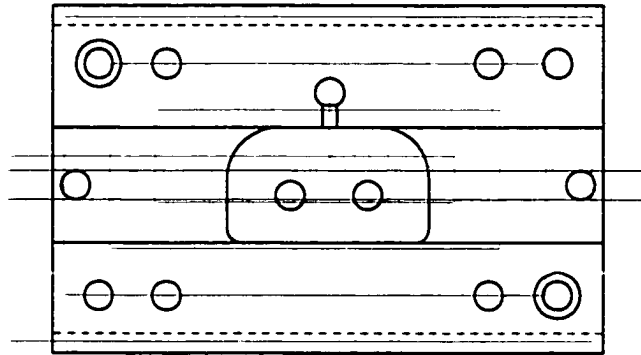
Top view of the rear mold used to generate the CNC program with EZ-Mill. The thin lines show the tool path for machining the top surface, the slot, and the gate.
